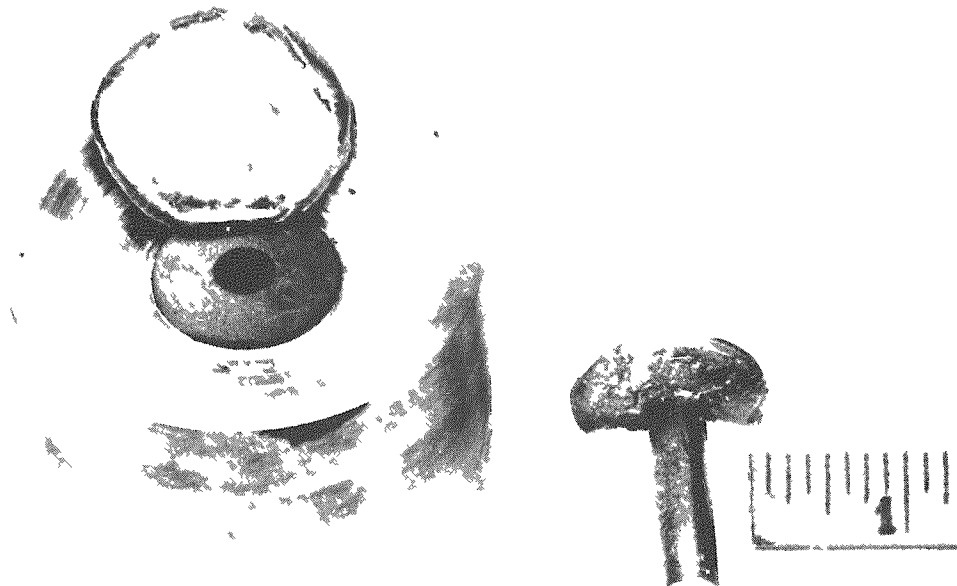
ASSEMBLED MOLD WITH ARC-MELTED UC BUTTON CHARGE AND FINISHED CASTING
